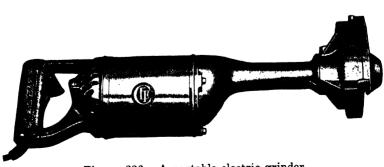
A portable electric grinder (Courtesy of: The Cincinnati Electric Tool Co.)
